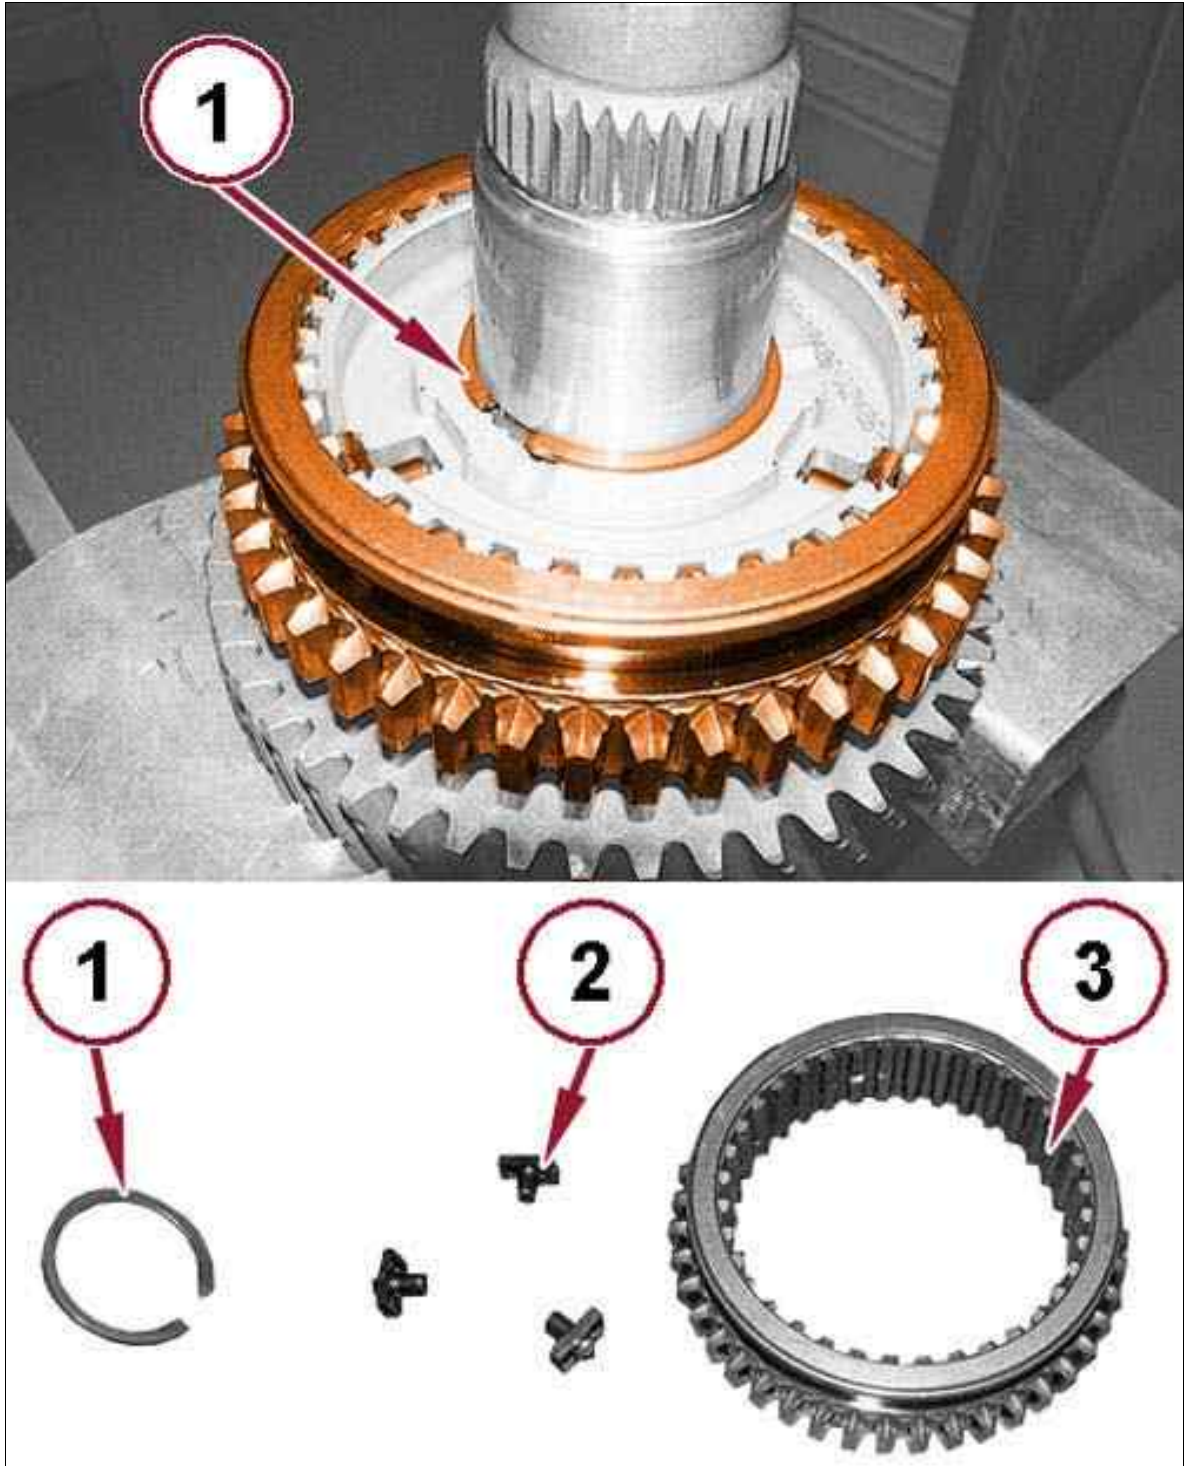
1st Speed Driven Gear, Synchronizer Ring, 1st-2nd And Reverse Synchronizer Hub & Special Tool
